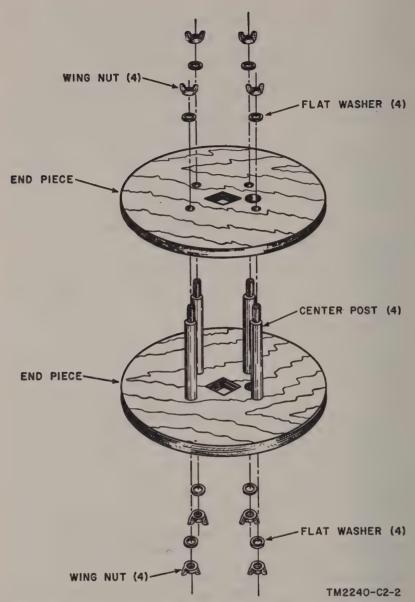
(Added) Wire reel for refilling Wire Dispenser MX-306A/G, exploded view.
